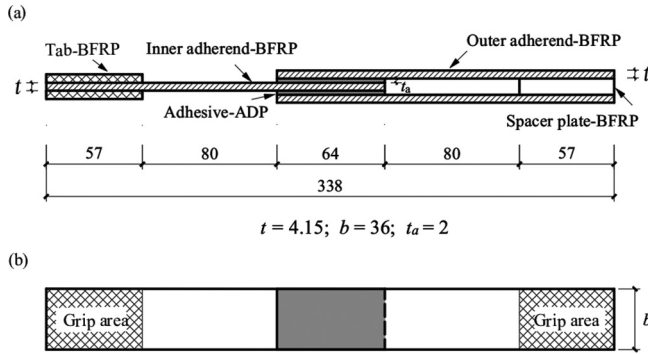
Dimension of bonded joints in (mm): (a) side view; (b) top view.
